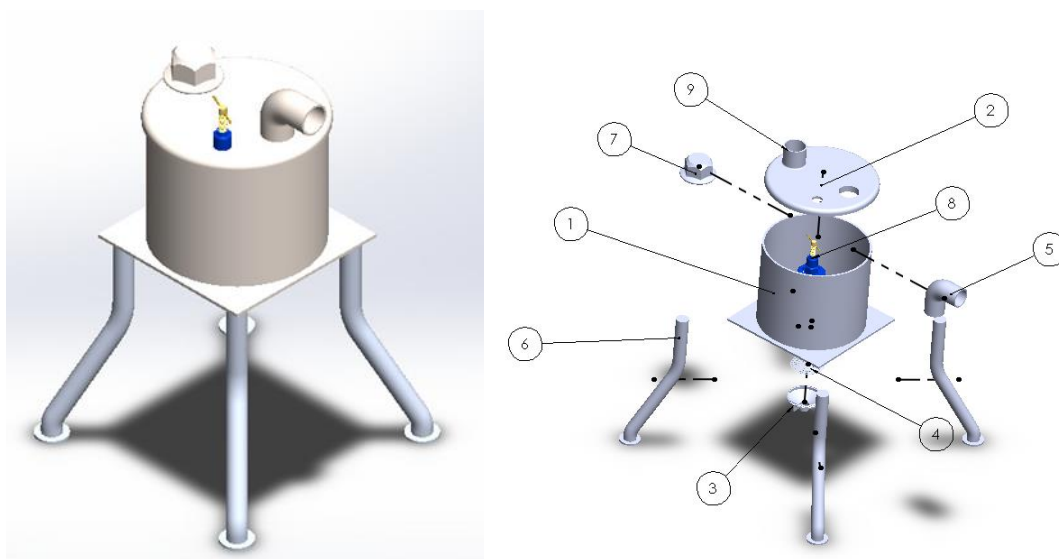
[a], [b]: 3D CAD diagram and Exploded view of the water treatment machine
